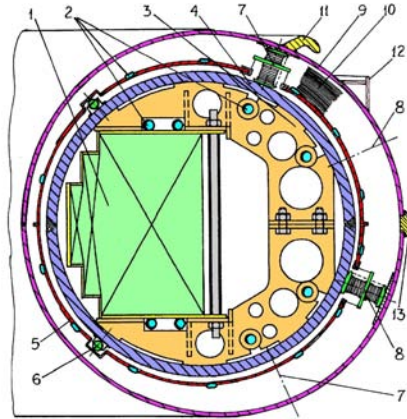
Cross-sectional view of the floating coil cryostat. 1. magnet; 2. heat exchanger; 3. gusset; 4. helium vessel; 5. radiation shield; 6. glass ball shield support; 7. vacuum shell and shield support; 8. side bumper; 9. vacuum shell; 10. MLI; 11. lifting disk; 12. laser beam control structure; 13. vacuum shell ring. (from Ref. [64] with permission)
